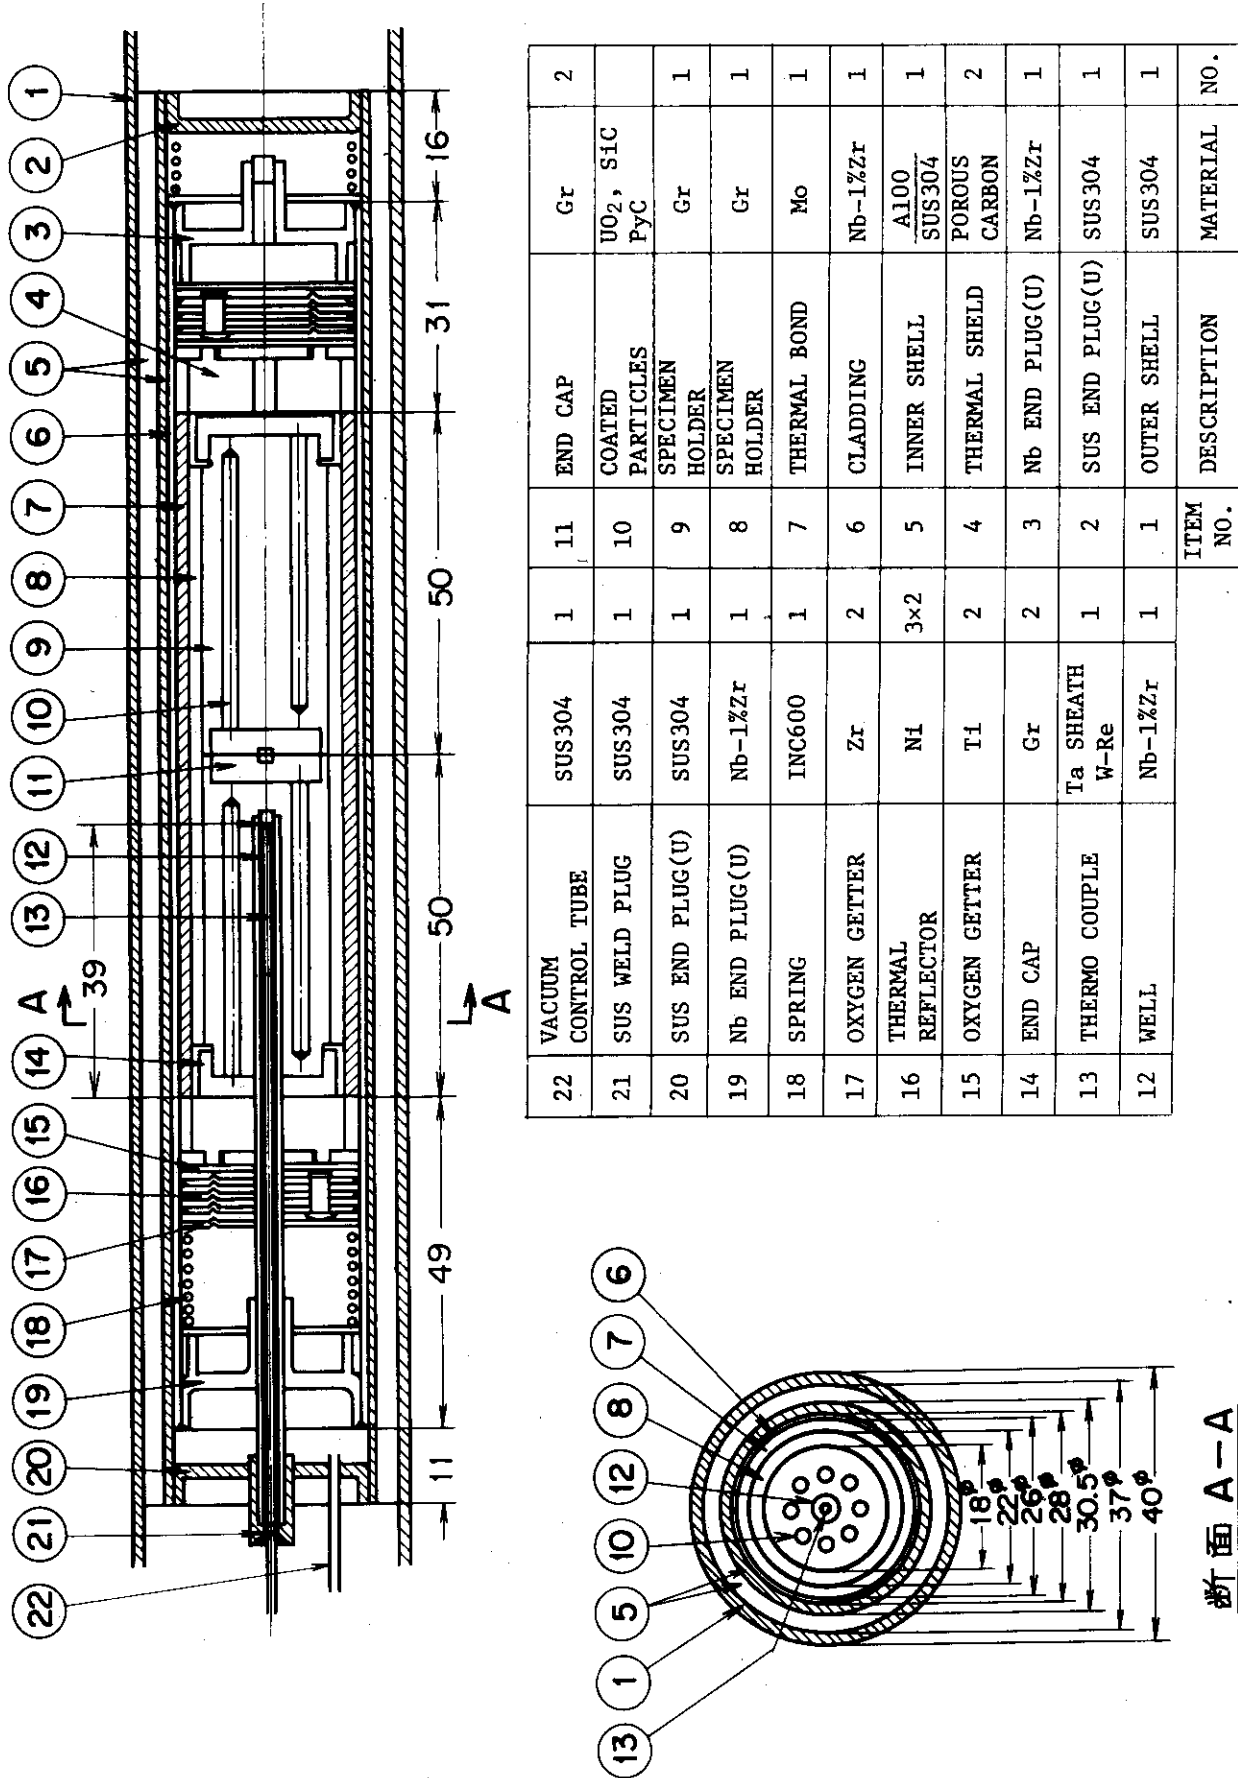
One Block Assembly of the 72F-7A Capsule
